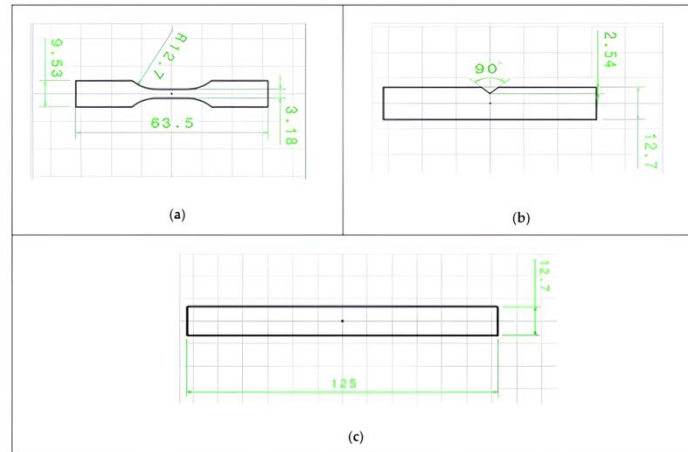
Standard specimens for: (a) Tensile test; (b) Impact test; (c) Flexural test.
